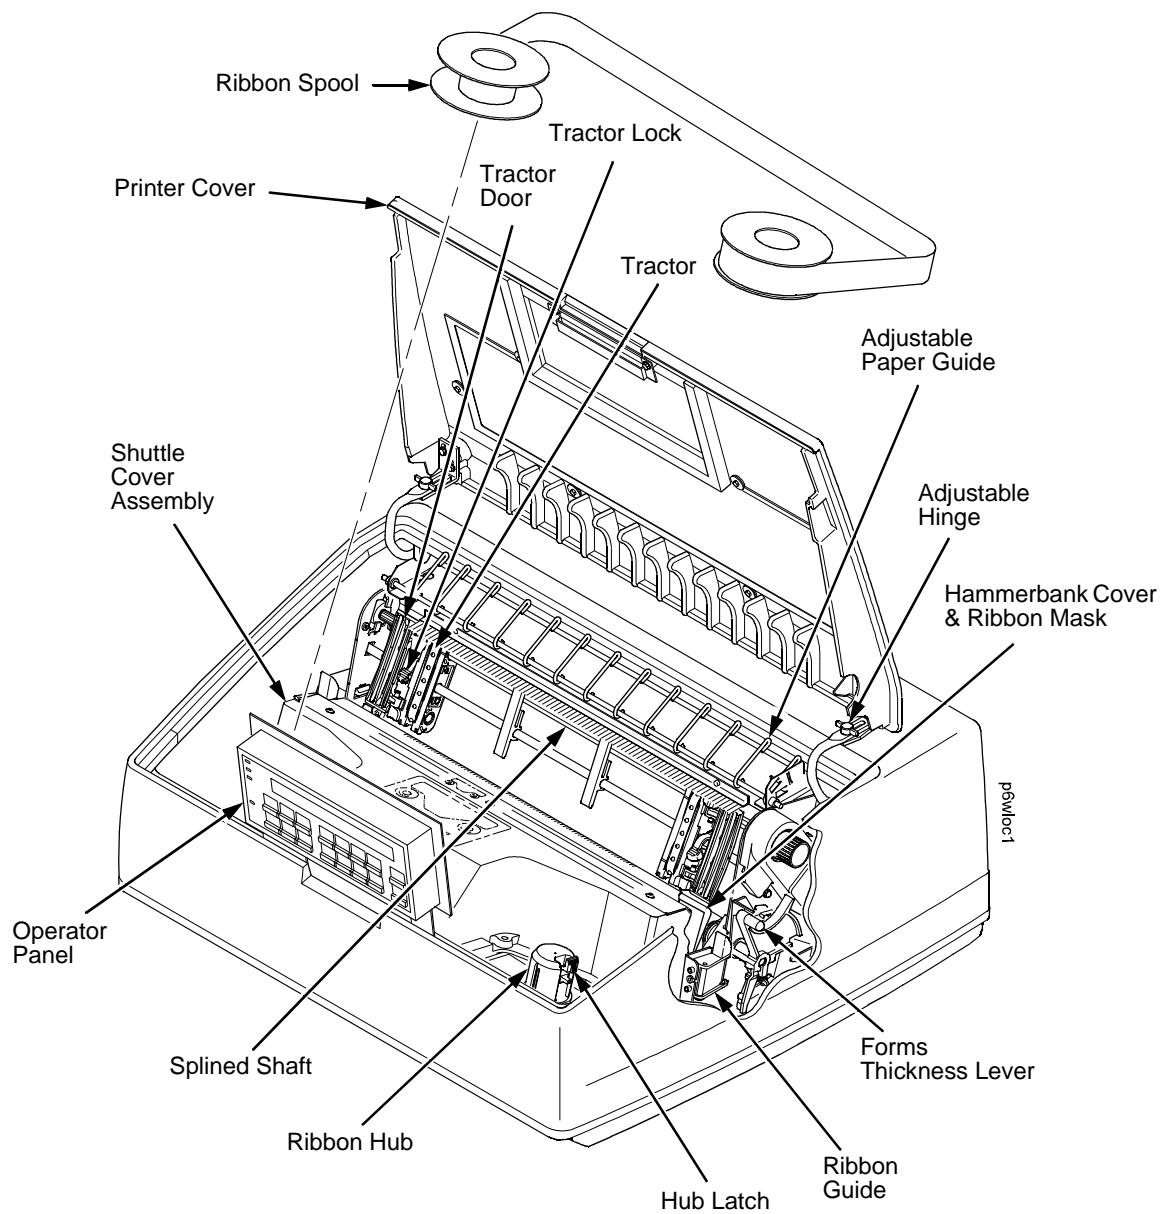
Pedestal Model Printer Component Locations with Open Access Cover and Ribbon Spools Exploded Above
